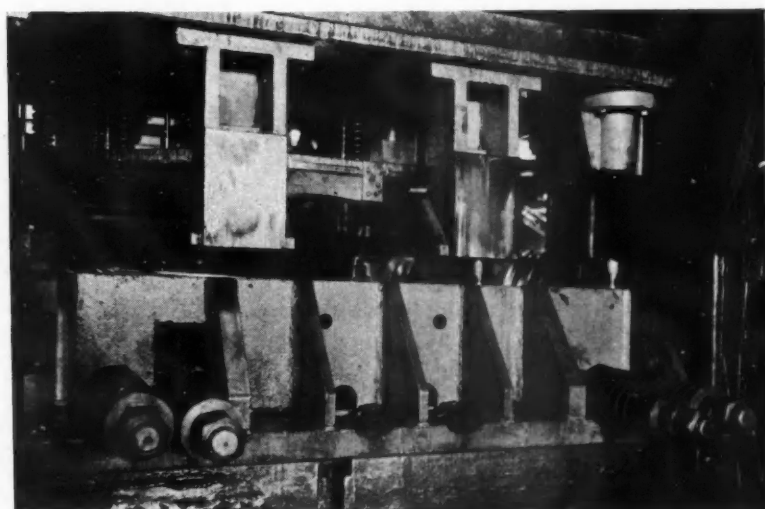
This large cam-driven side-acting die has base and driver supports of welded steel
